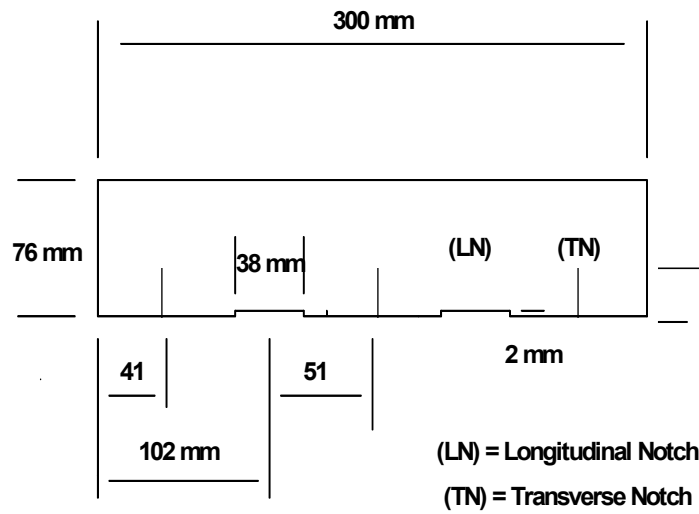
Longitudinal and transverse notches in the slotted cruciform test weld assembly.
